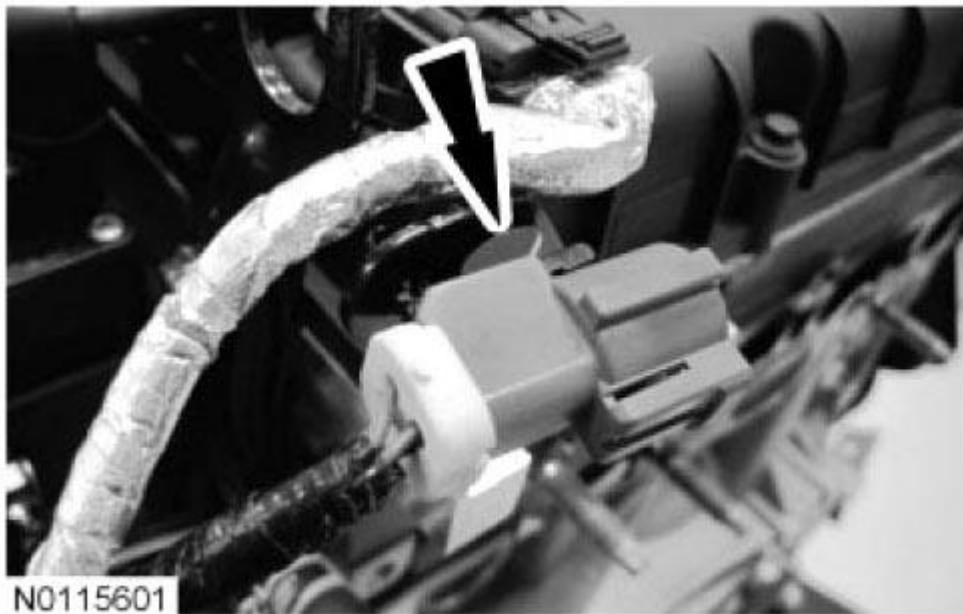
Locating HO2S Sensor Electrical Connector Pin-Type Retainer From Bracket
